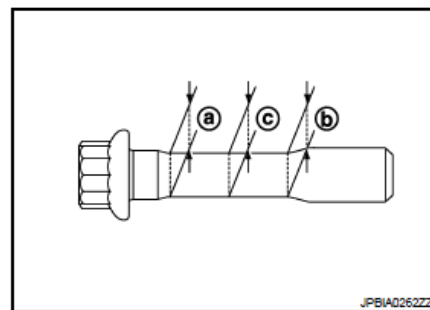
Identifying Connecting Rod Bolt Outer Diameter
